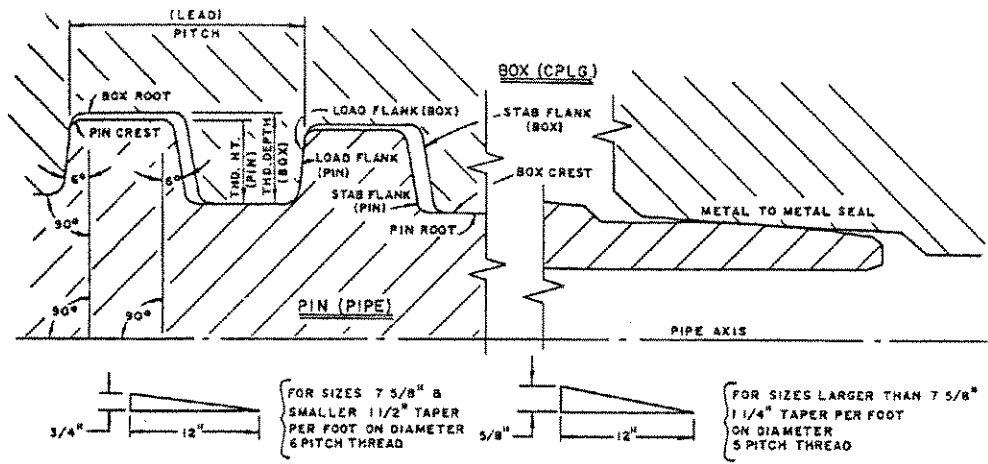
Thread Configuration [38,39], Extreme-line Casing Threads
